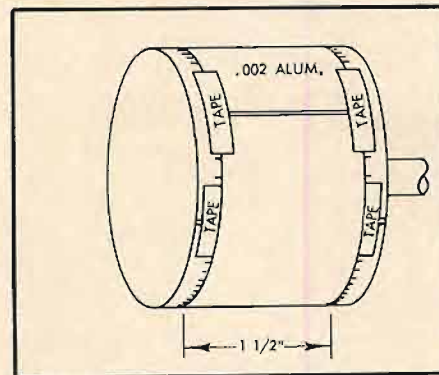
Winding mandrel. Aluminum coil former in place on top of slotted fish paper.
